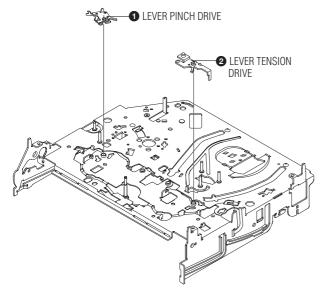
Lever Pinch Drive, Lever Tension Drive Removal
